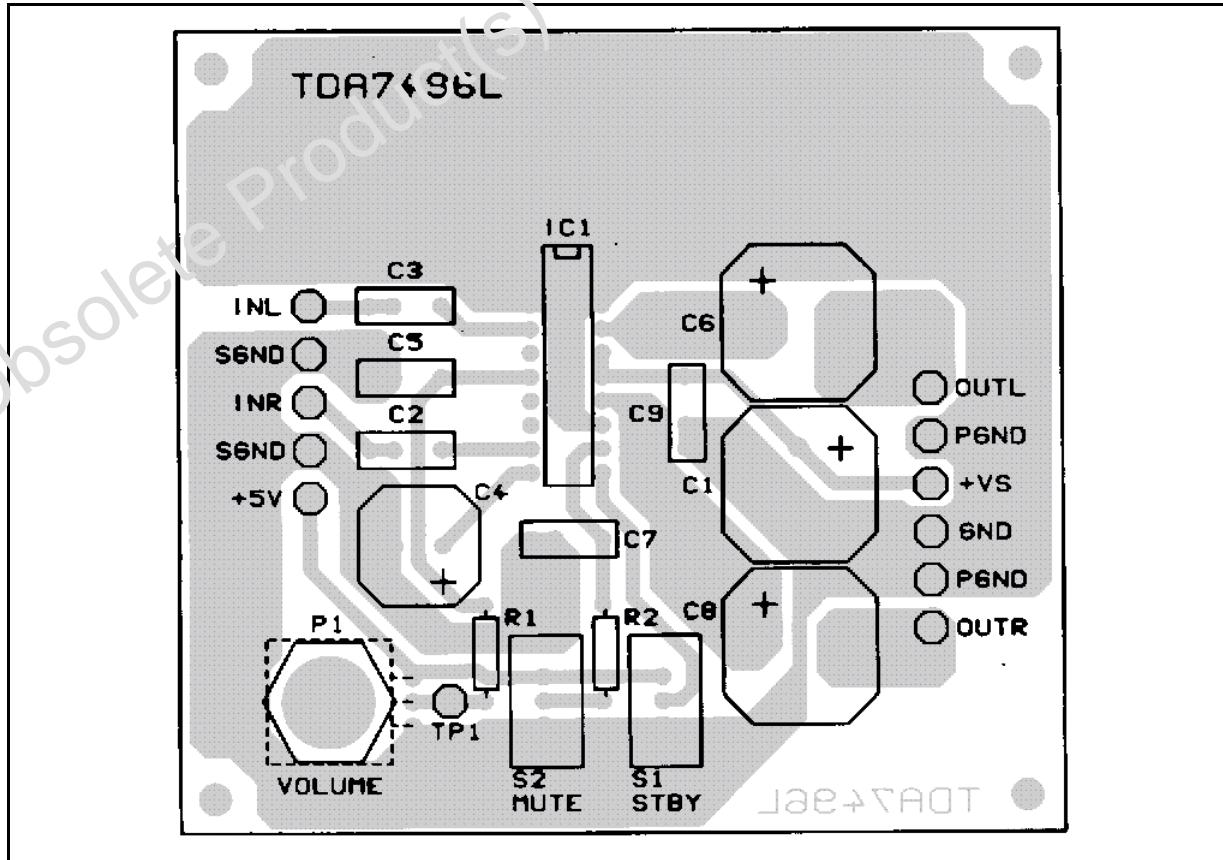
B. PCB and Component Layout of the Fig. 1A (1.25:1 scale)
